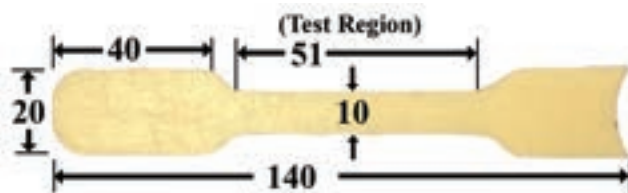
Tensile specimen dimension (in mm) with thickness of 3 mm.
